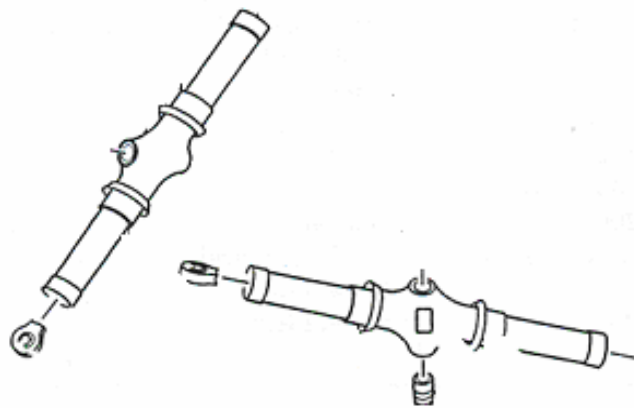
Tail Rotor Hub Assemblies (AH-64A/D)
